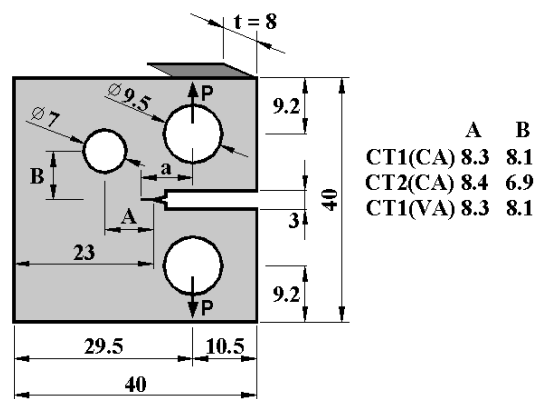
Measured dimensions of the hole-modified C(T) specimens (mm).
